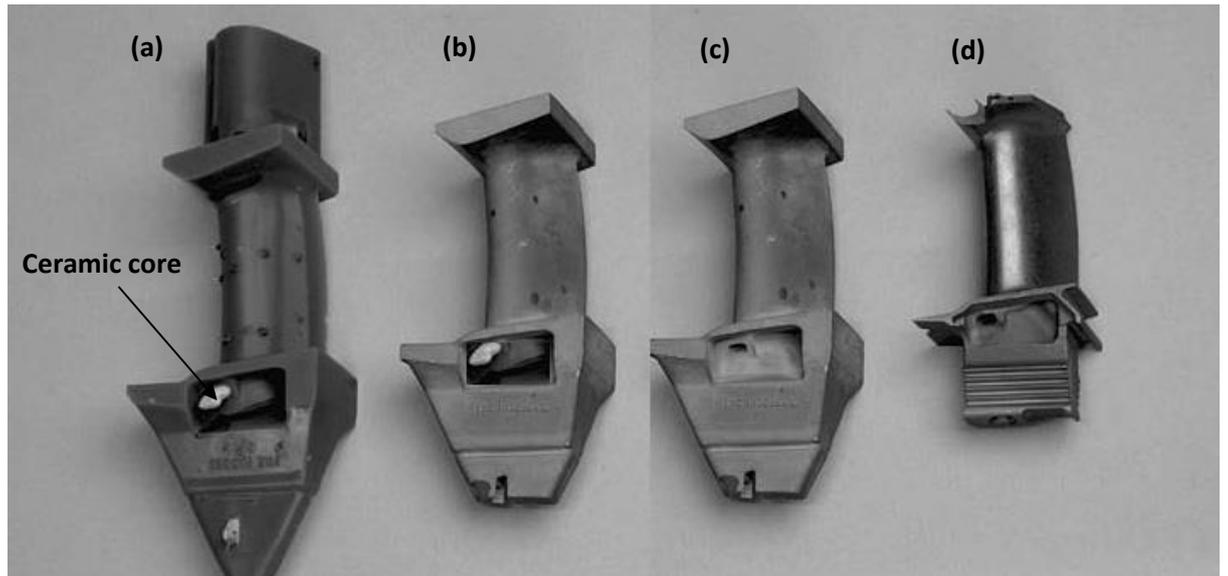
Production Stages of a high pressure turbine blades during the investment casting process. (a) Wax model of blade with ceramic core (b) Cast metal with ceramic core (c) Cast metal without ceramic core (d) Heat treated and machined turbine blade (16)
